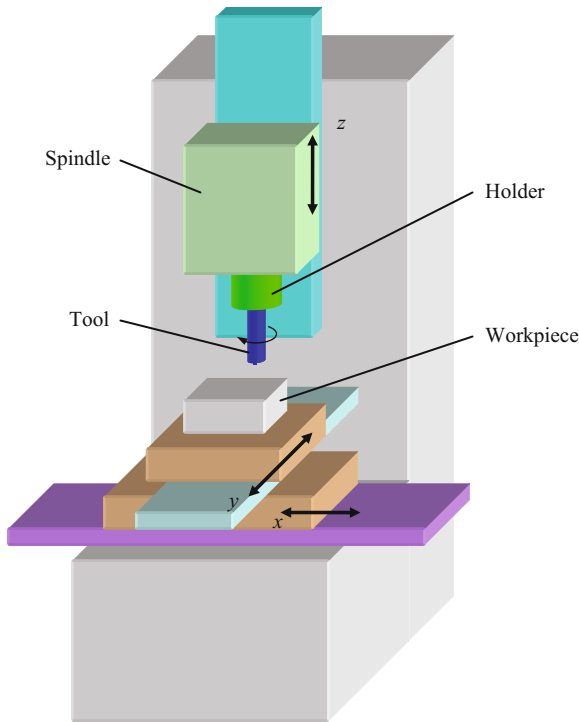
Schematic of vertical spindle milling machine. The tool is clamped in a holder which is attached to the rotating spindle. The tool-holder-spindle is moved relative to the workpiece using the three orthogonal axes to remove material in the subtractive milling process
